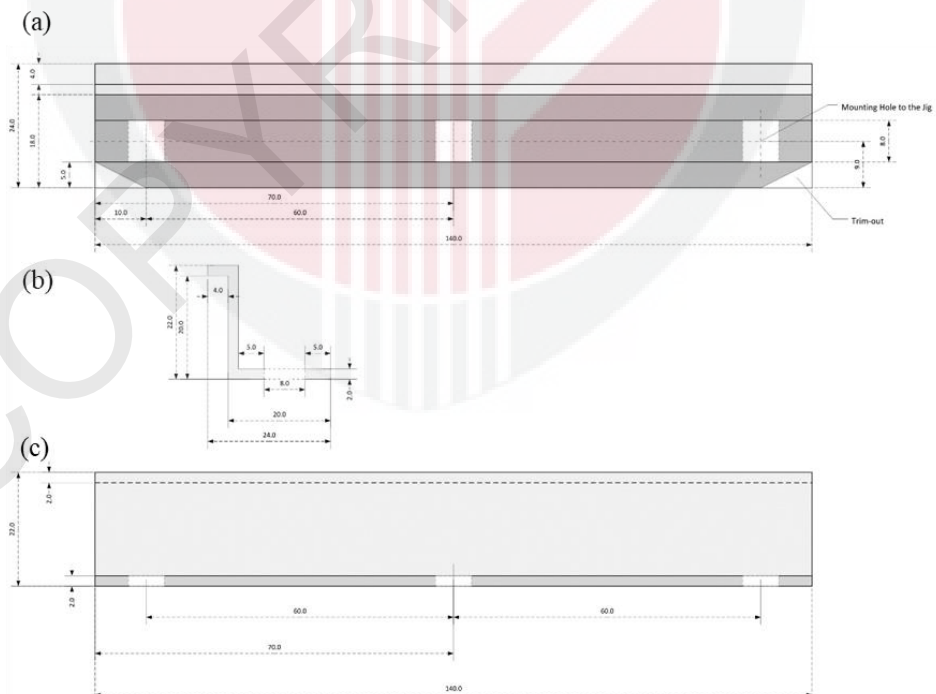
Schematics of the side bracket. (a) Top view, (b) side view and (c) front view
